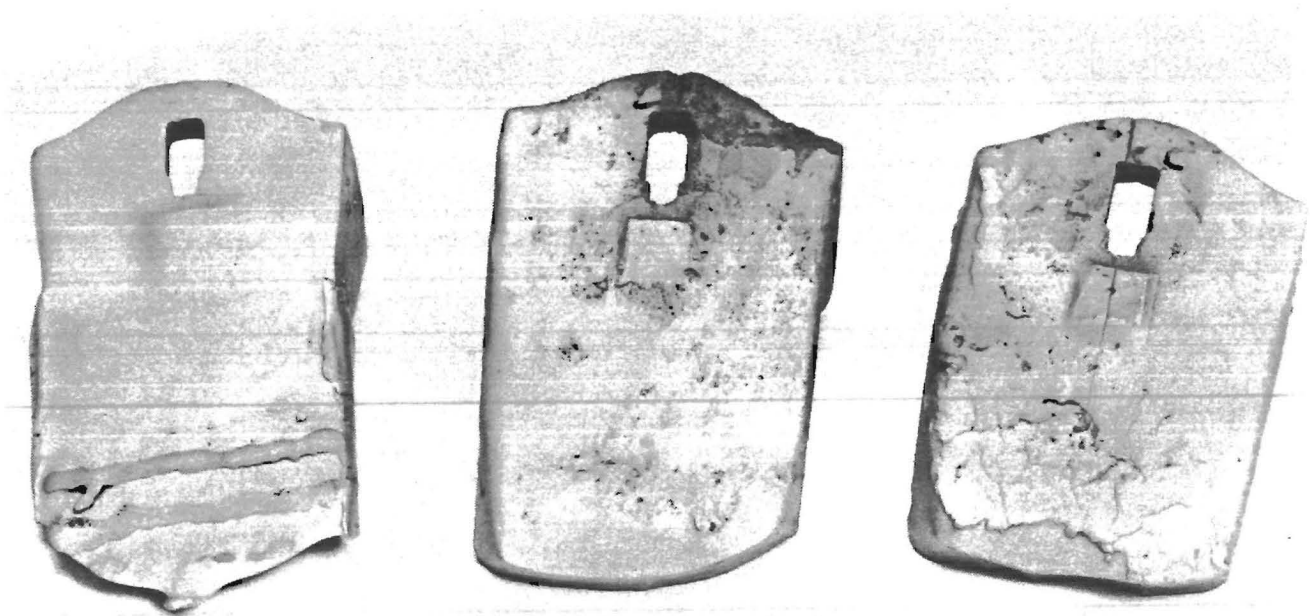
Bucket-wheel excavator teeth after field trials at Centralia, WA, coal mine. Left, weld-rod hard-faced control tooth; middle, Fe-5C-21Cr-8.5Cb-9Mo-0.3Mn-0.6Si composition white iron alloy cast-on-surfaced tooth; right, number 2 custom ferrochrome cast-on-surfaced tooth.
